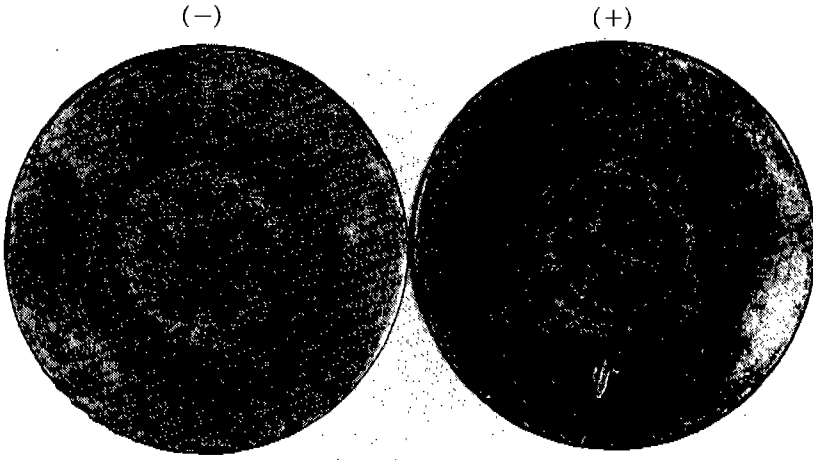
Surface damage of electrode depending on polarity in DC welding
